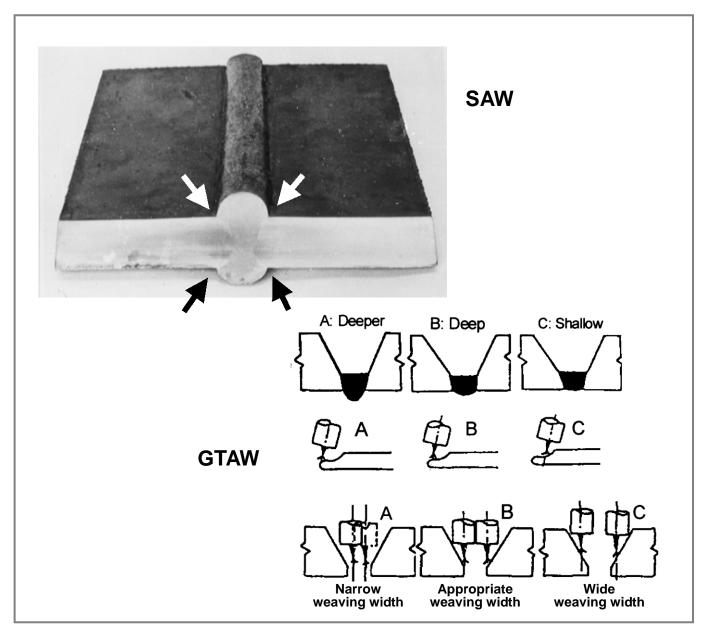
EXCESSIVE WELD REINFORCEMENT
